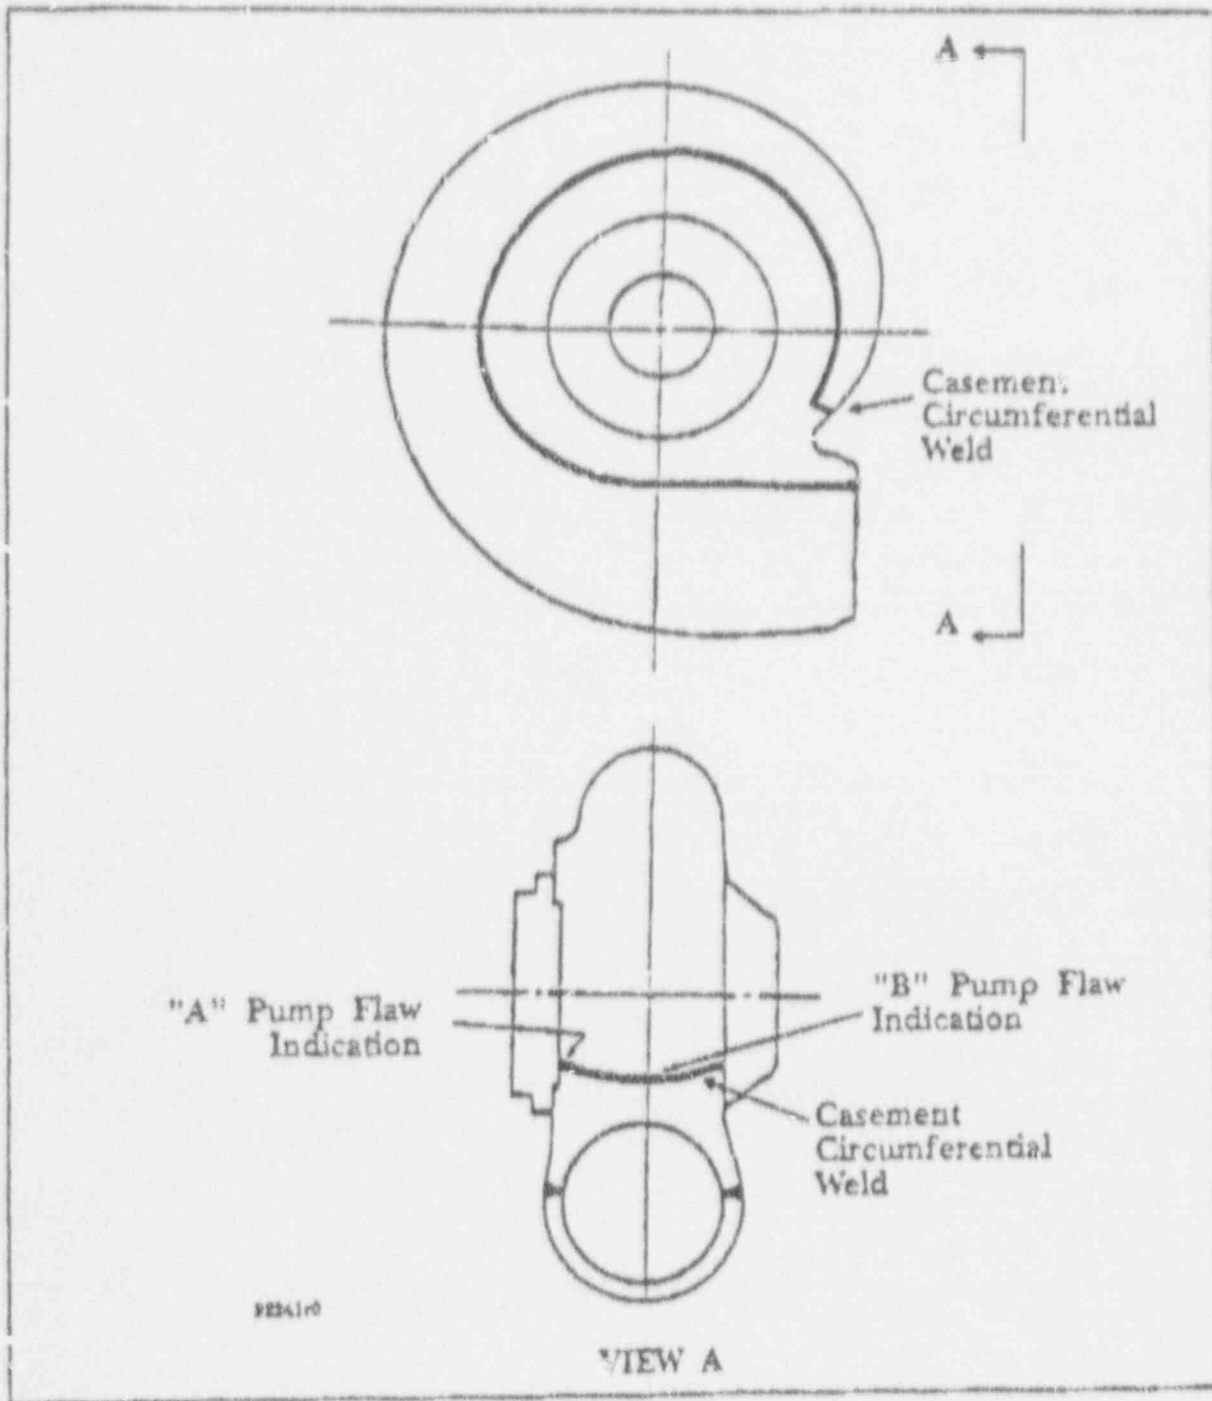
Schematic Drawing of Weld Flaw in Arkansas Nuclear One Reactor Coolant Pump, Unit 1
